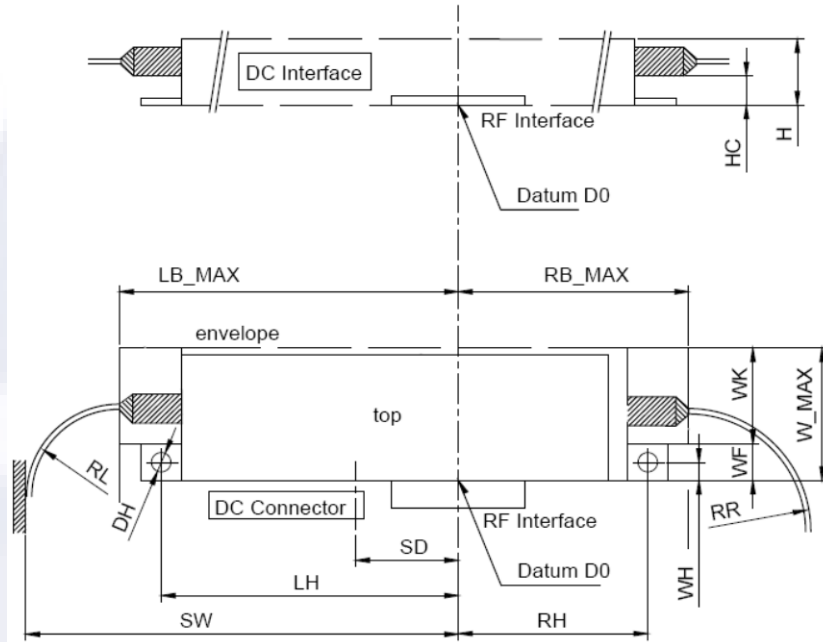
Location of Datum, interfaces, and definition of dimensions.
